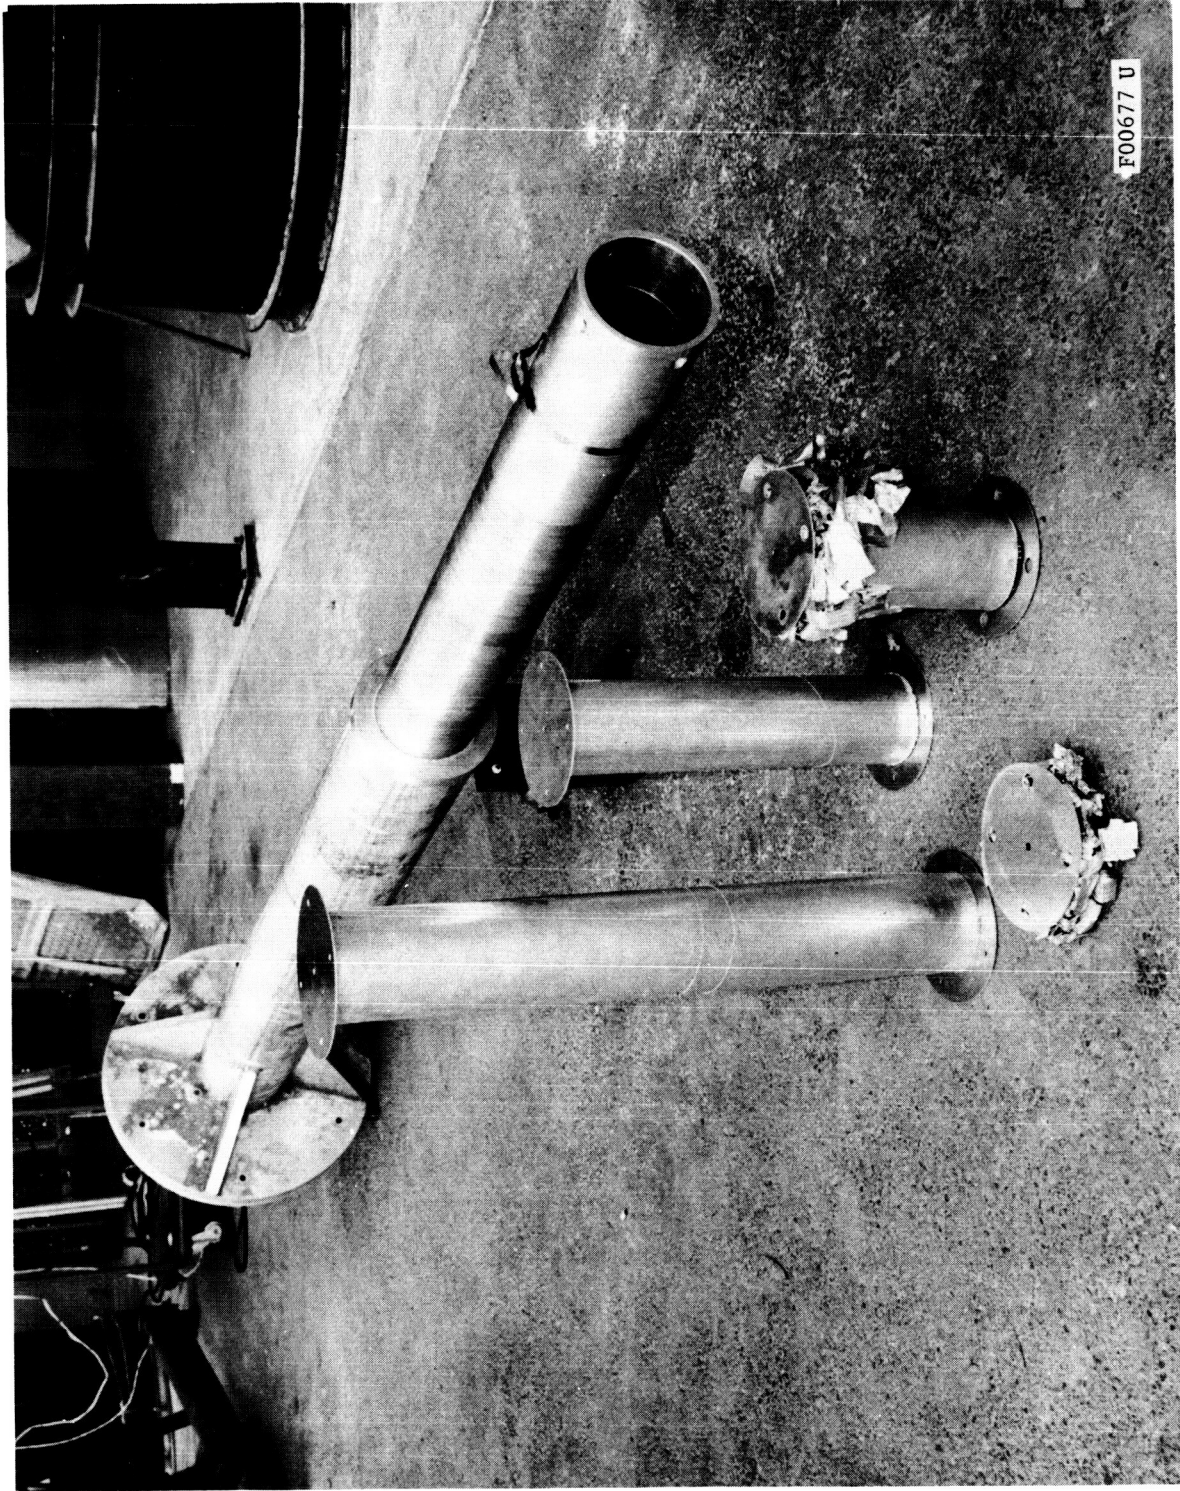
BOILER PLATE LEM STRUT WITH CRUSHED AND UNCHUSHED PIECES OF HONEYCOMB
